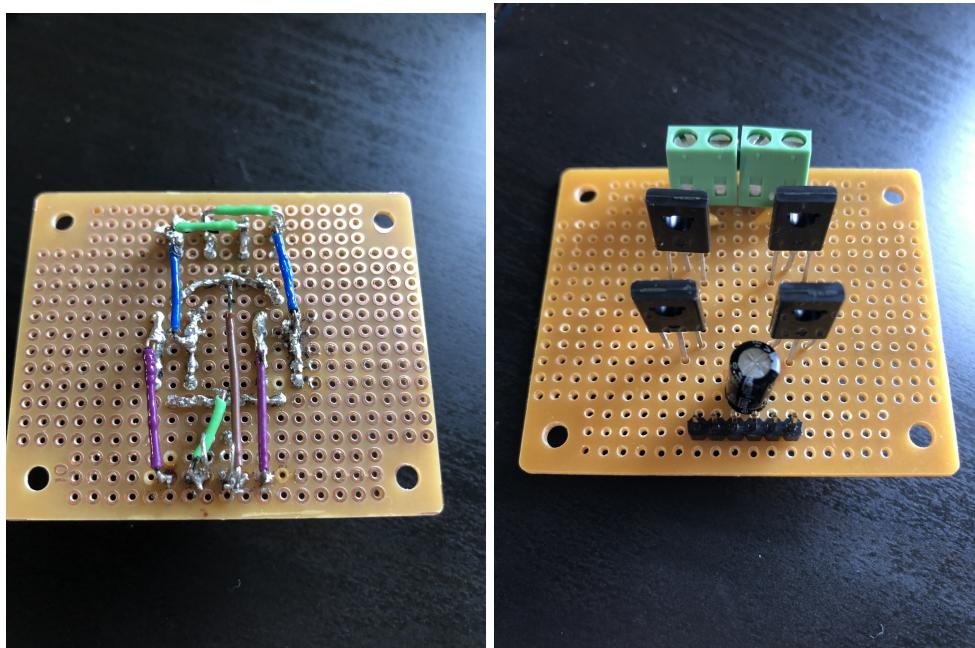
Motor Driver Circuit Soldered onto a Breadboard (TM2)
